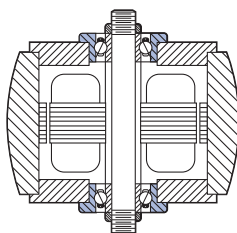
Typical Motor design using rotor as outer ring spacer and stator mount as inner ring spacer – outer ring rotation – Solid preload
